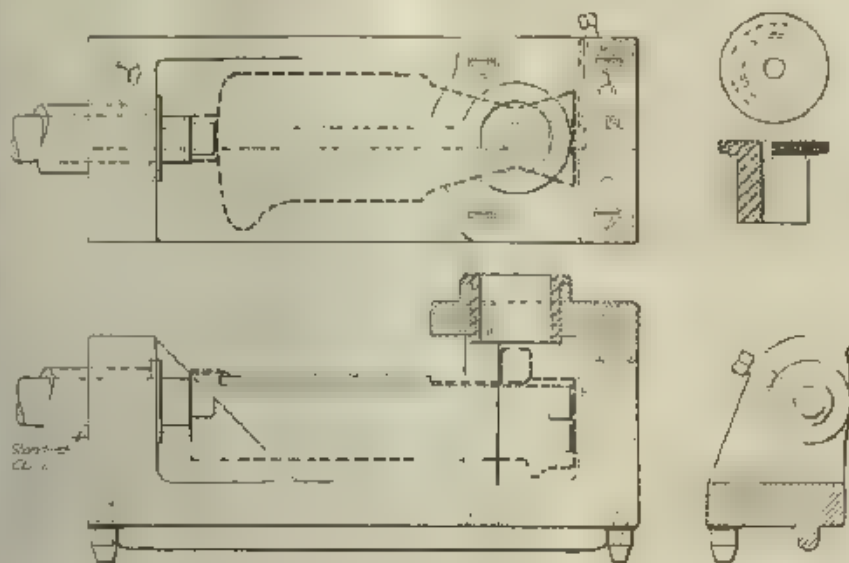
DRILL JIG FOR MAGAZINE BOSS
